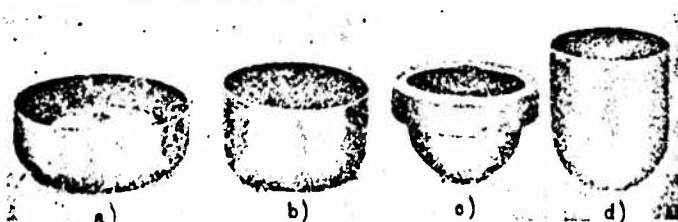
Sequence of operations of drawing a hemispherical cup from alloy TsM-2A 0.76 mm thick from a blank with a diameter of 98 mm (ears cut off): a) first drawing; b) second drawing; c) reverse drawing, not to completion; d) part after reverse drawing.
